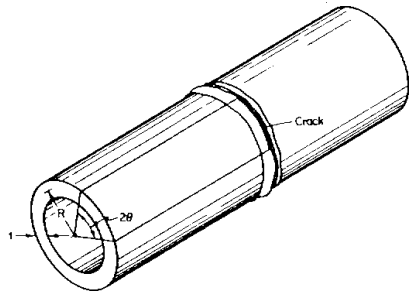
Circumferential crack in a pipe butt weld
